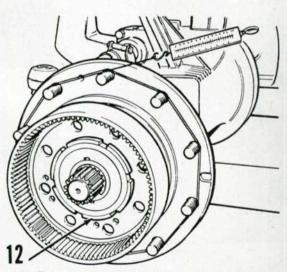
To adjust wheel hub bearing preload, use a spring scale and cord as shown to measure rolling resistance of hub. Refer to text and tighten slotted nut (12) as necessary.
